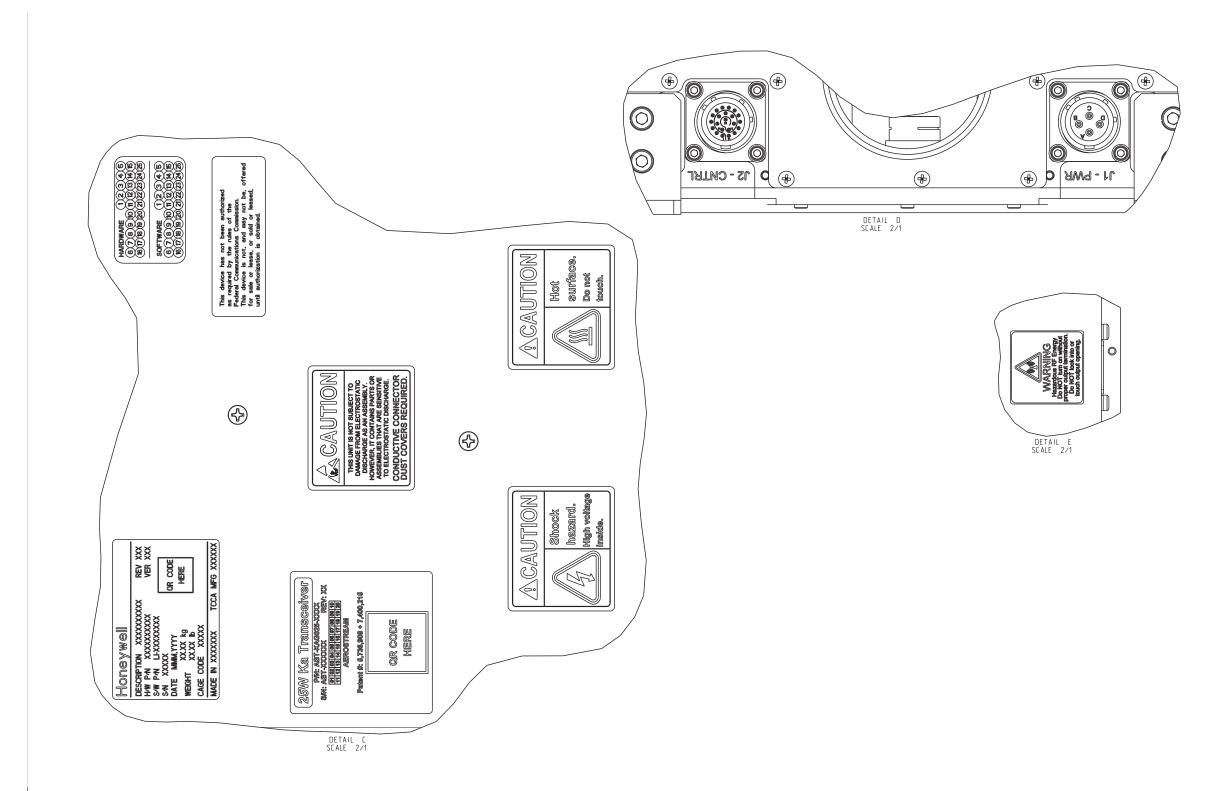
KRFU, Forced Air Cooled, Outline and Installation Drawing (Sheet 3 of 3)
